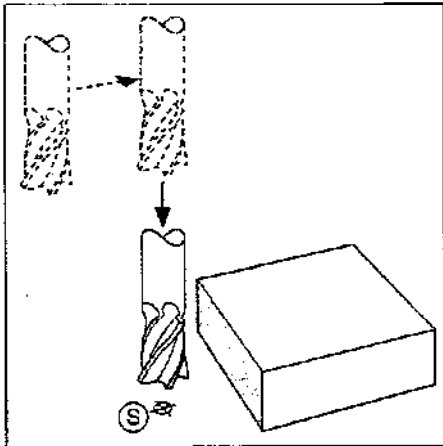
Separate movement of the spindle when there is danger of collision
